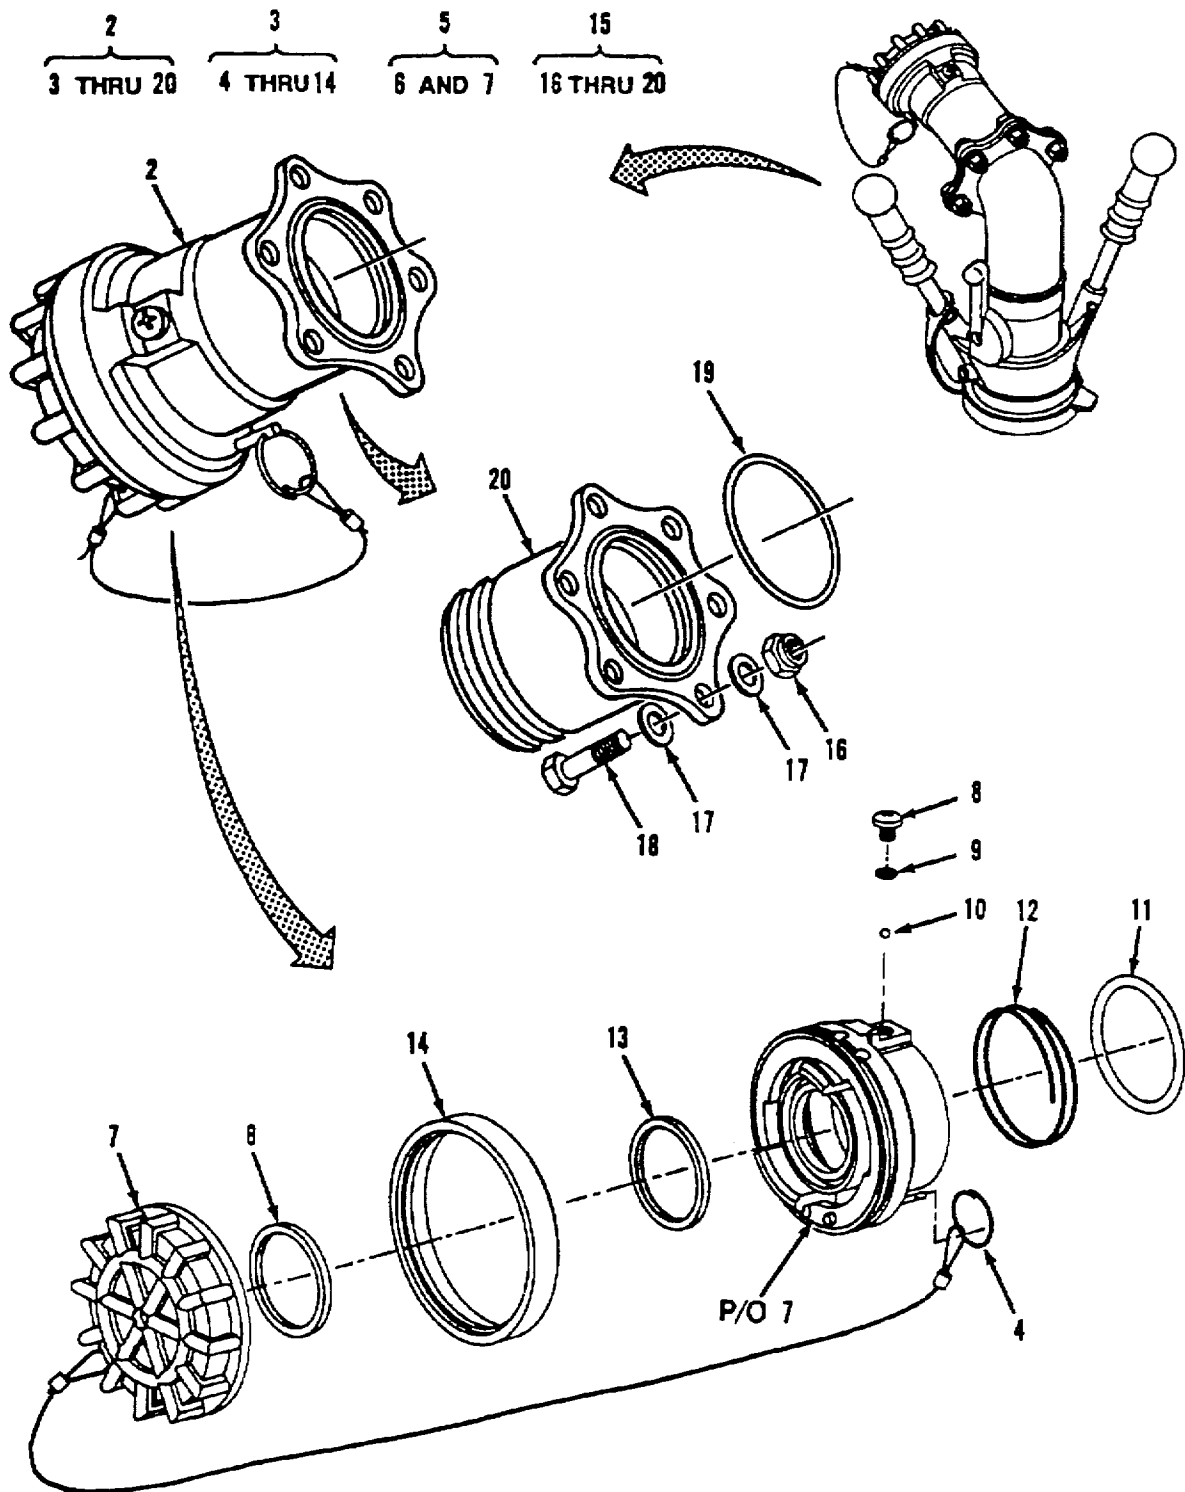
Pressure Fueling Nozzle Assembly (HTARS100) (Sheet 2 of 4)
